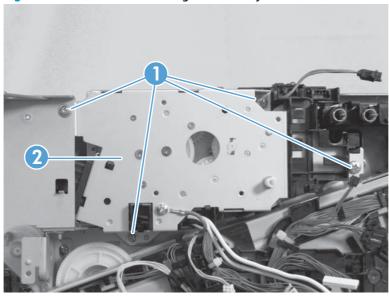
Remove the fuser gear assembly (9 of 9)
